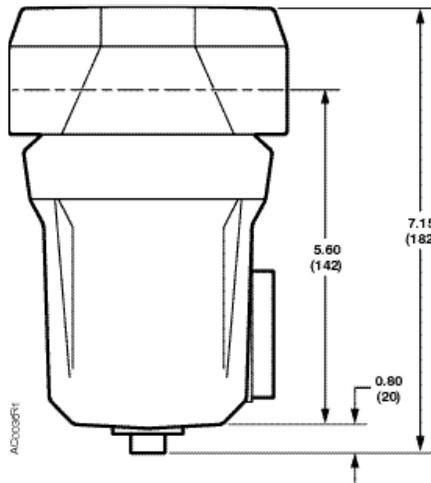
Air Line Filter Assembly Dimensions in Inches (Millimeters).
